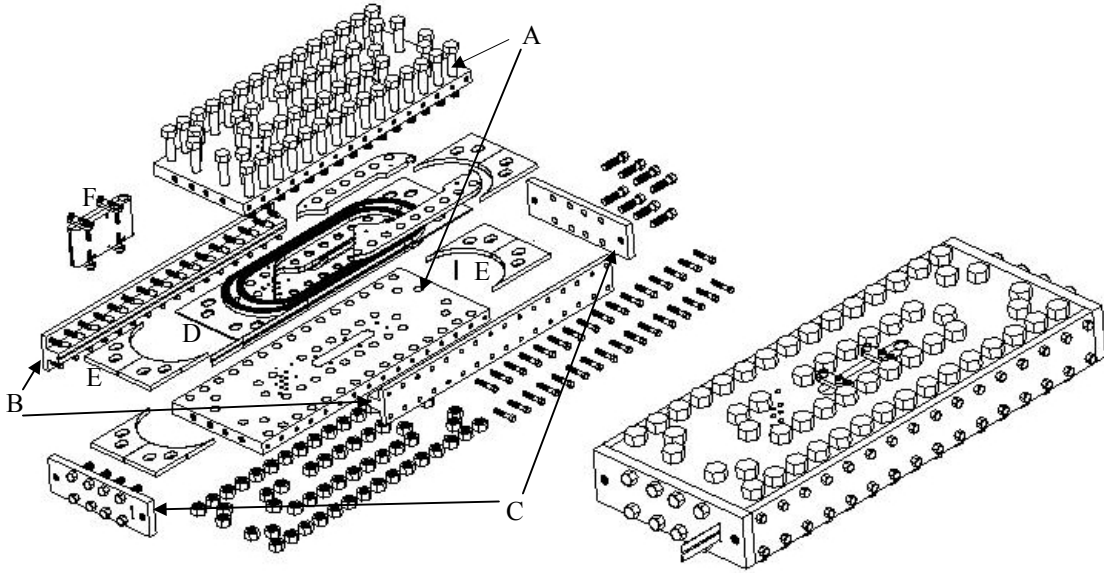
Racetrack assembly, see text for details. The end plates (C) are an old design without bullets and less thick than present plates.
